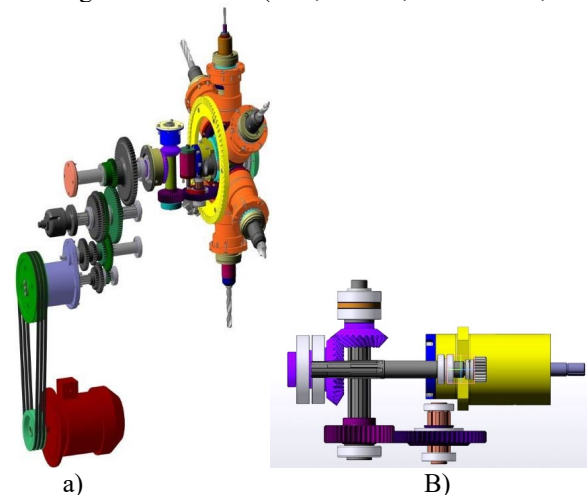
3D kinematic models: a) main drive; b) turret head rotation mechanism
